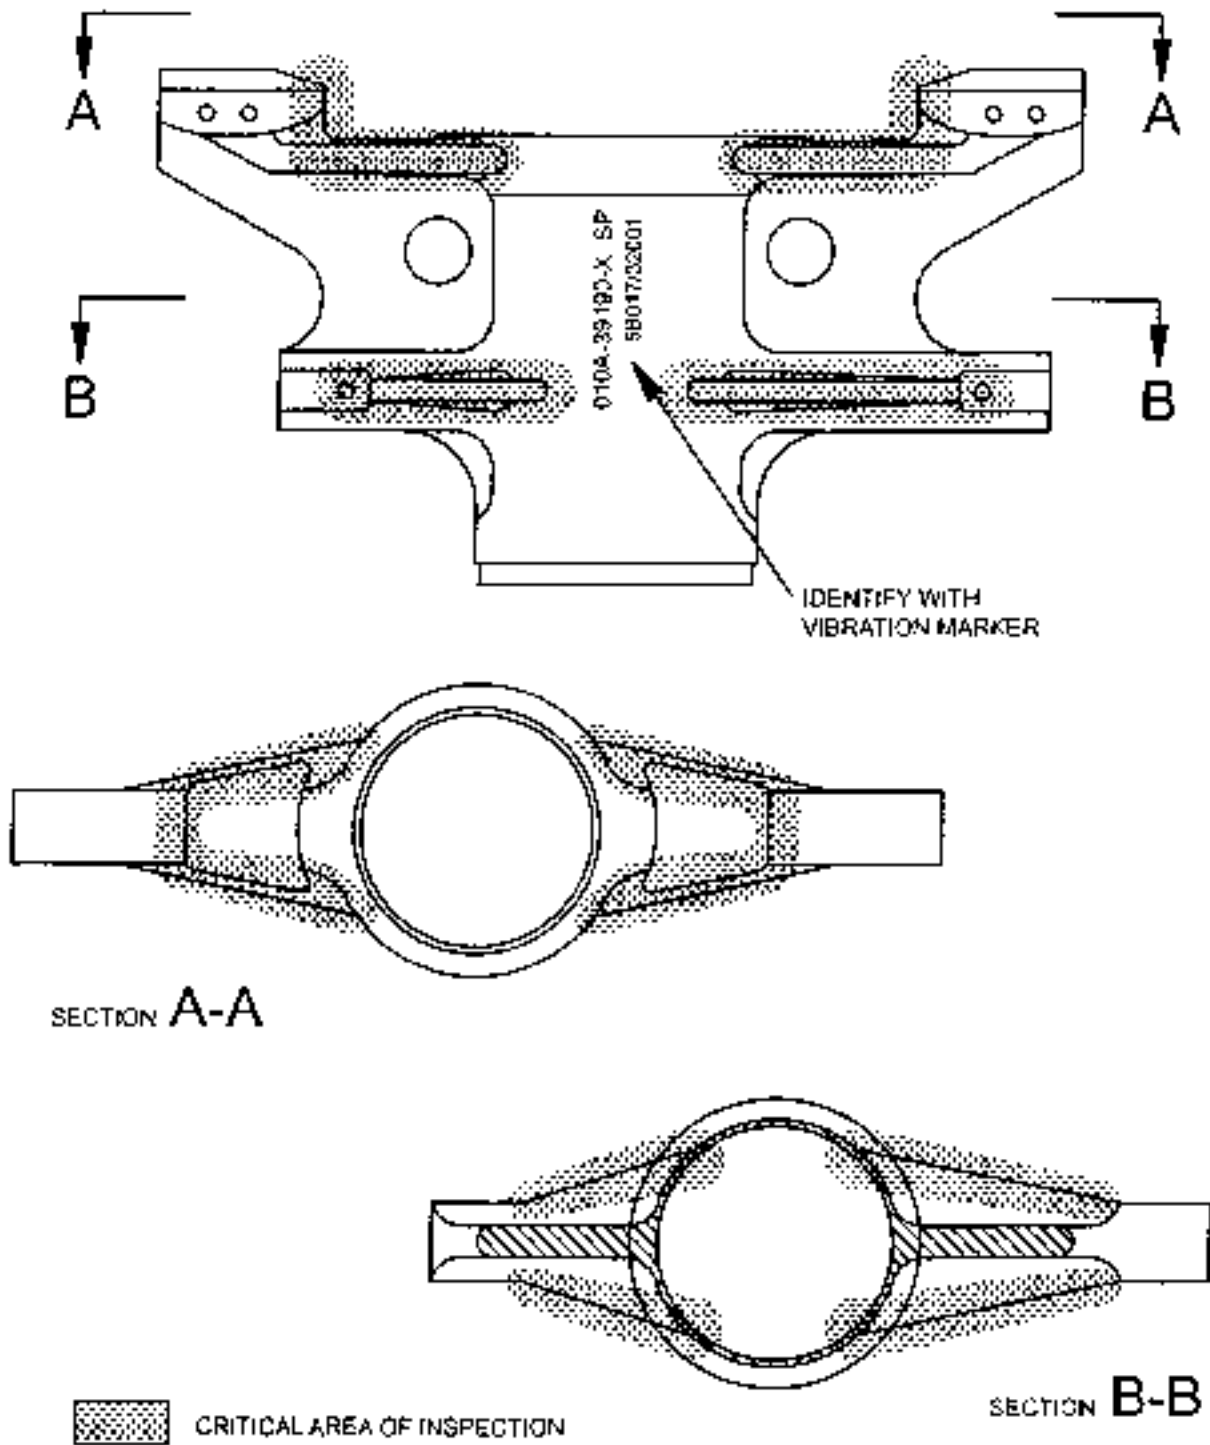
A 010A-3919C-11/-13 Tensioner inspection area
